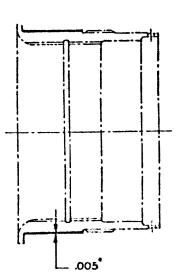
Cronkshaft Rear Bearing Parts No. 25088, 64836
